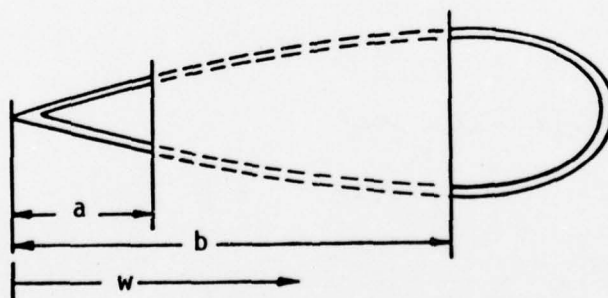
SCHEMATIC OF DAMAGED STABILATOR CROSS-SECTION
